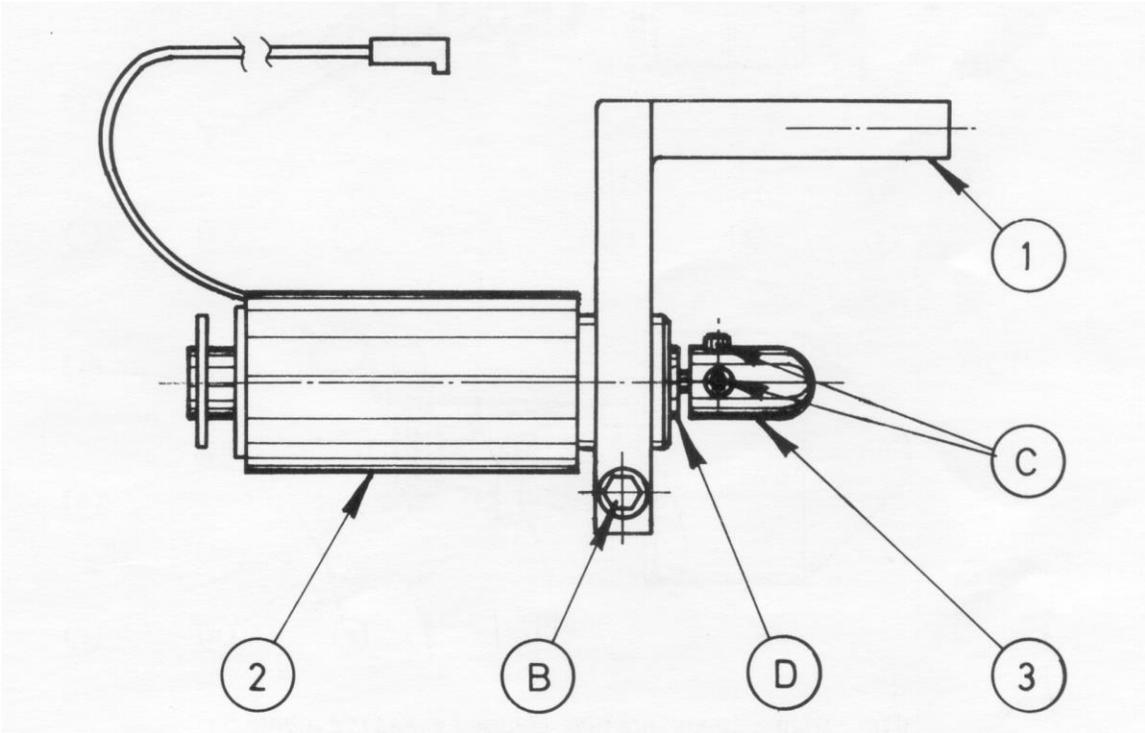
EFO SOLENOID BRACKET ASSEMBLY (#4124-0451-0)
